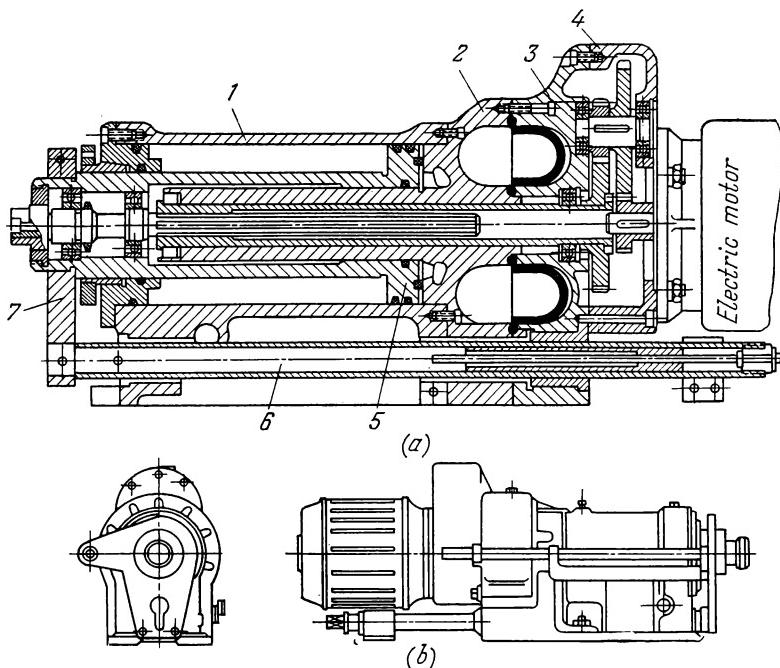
Axial section of the model FC-2 pneumohydraulic power unit
